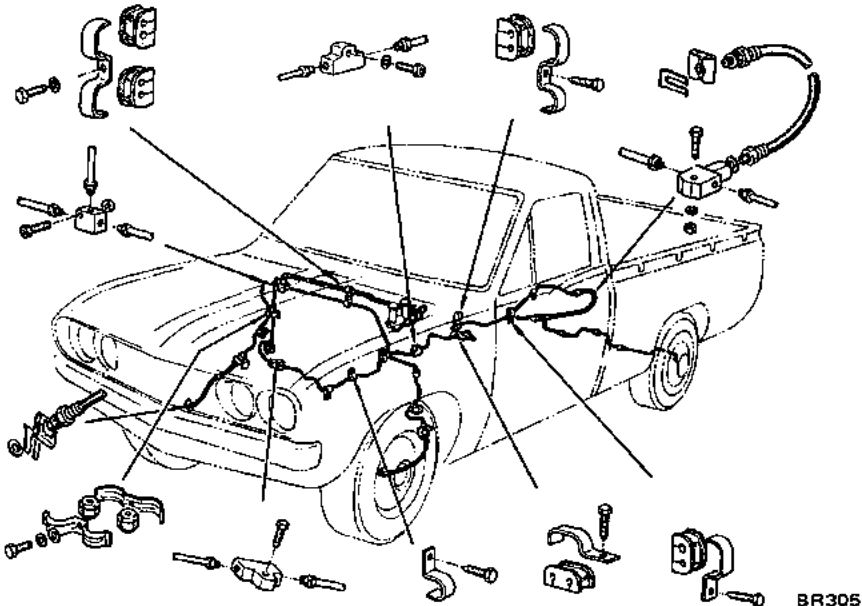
Brake line of L.H. drive (Tandem master cylinder)
